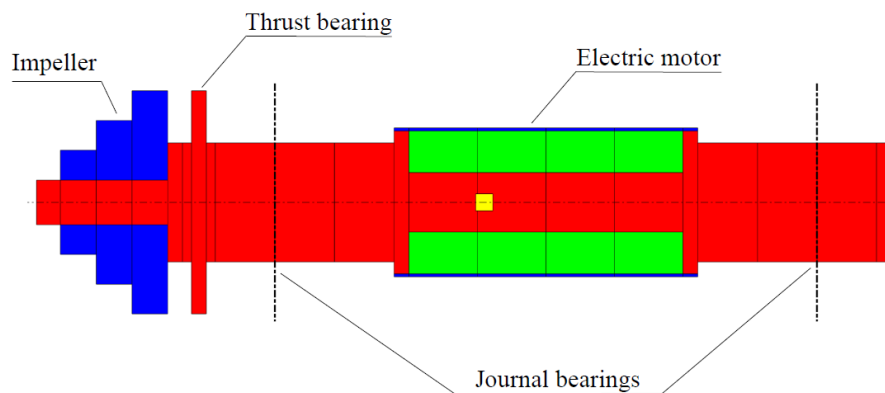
Rotor layout of the gas bearing supported single stage compressor and its dimensions
